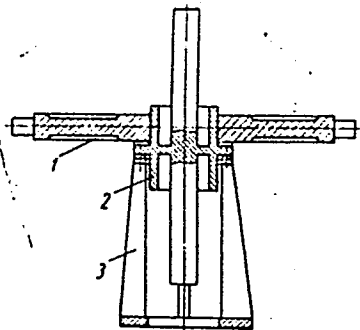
Balancing fixture: 1 - disk; 2 - insert; 3 - stand.
